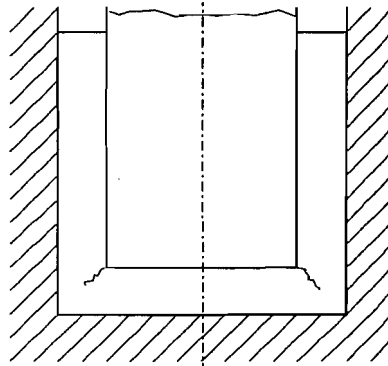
λ -Crack, a crack that is caused by a too small punch radius in piercing.
